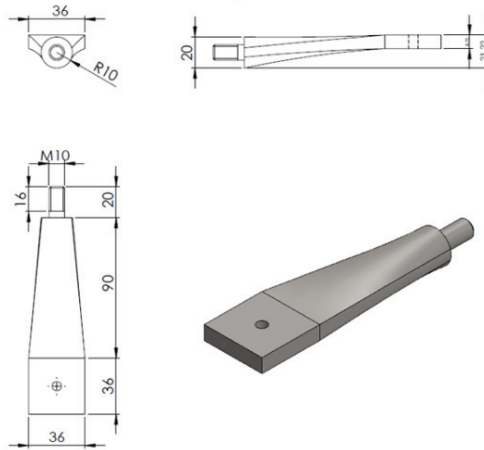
Technical drawing of TSHPB incident bar fixture apparatus
